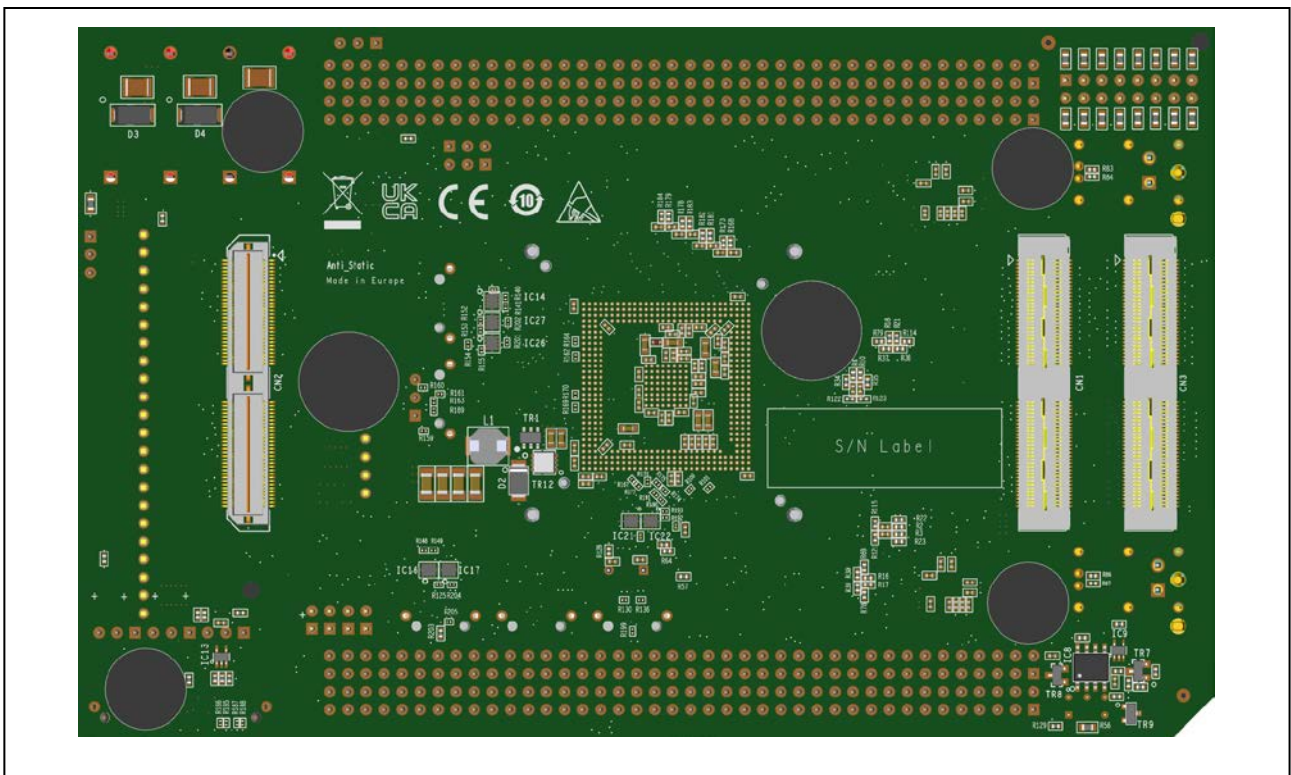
D018177_06_V02 Piggyback board bottom view
